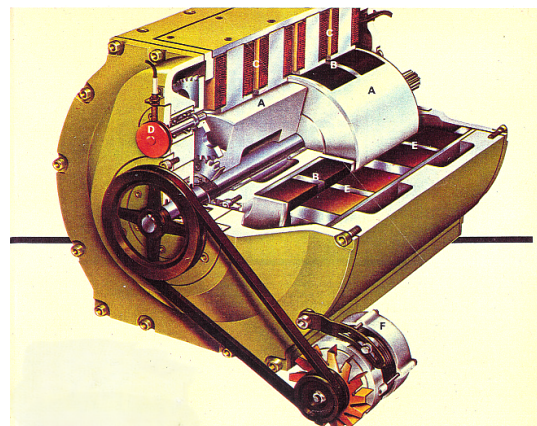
Impression from [1], showing staggered rotor drums (A) with magnets (B), electromagnet coils (C), gear-driven distributor (D), stator spiral assembly (E), auxiliary drive (F).
